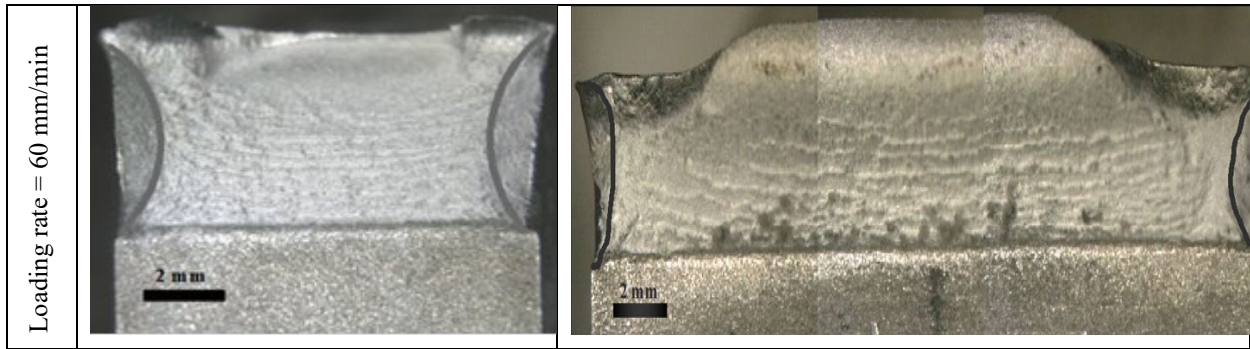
Overview of the fracture surface of Al6061
